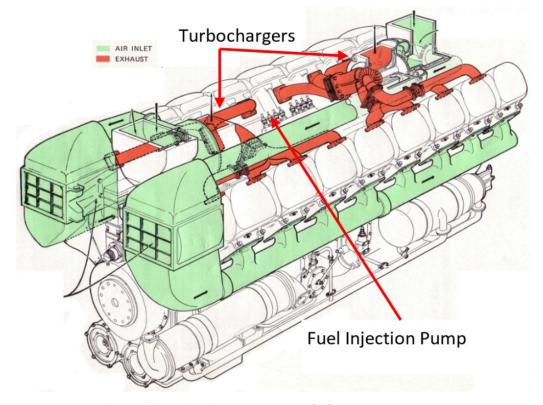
General view of the Pielstick PA4 V185 engine [18].
